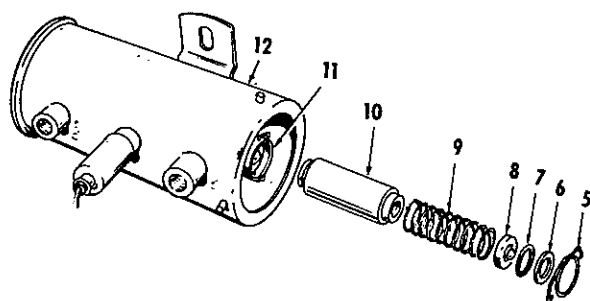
REMOVAL OF RETAINER, "O" RING, CUP VALVE, SPRING AND PLUNGER
